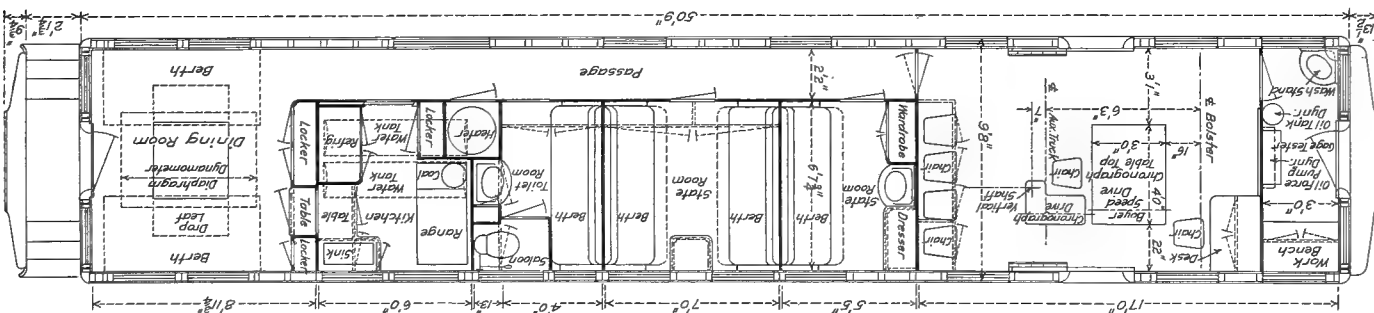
Floor Plan of Baltimore & Ohio Dynamometer Car Shown in Fig. 200.
